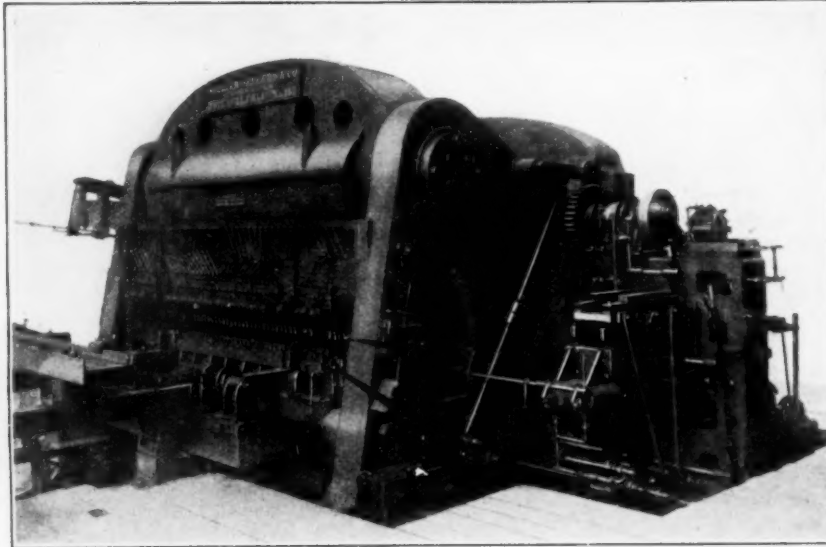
MULTIPLE PUNCHING MACHINE. OPERATED AUTOMATICALLY FROM A PUNCHED PAPER TEMPLATE
